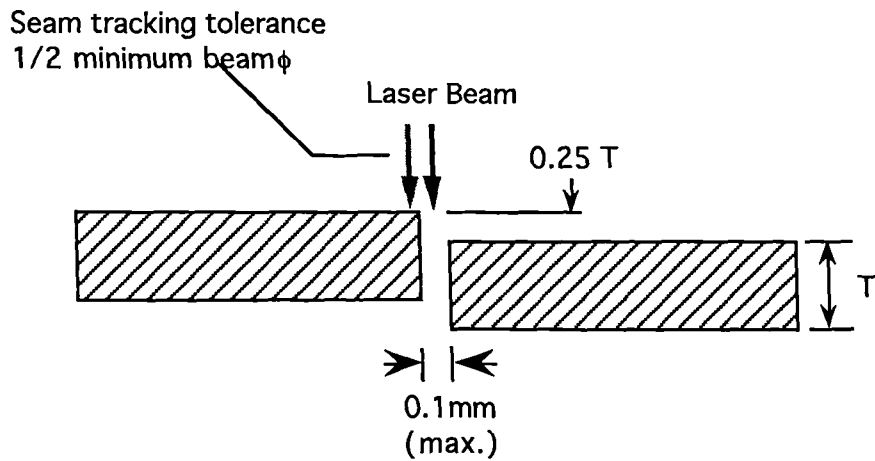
Standard fit-up and alignment tolerances for laser butt welding.
